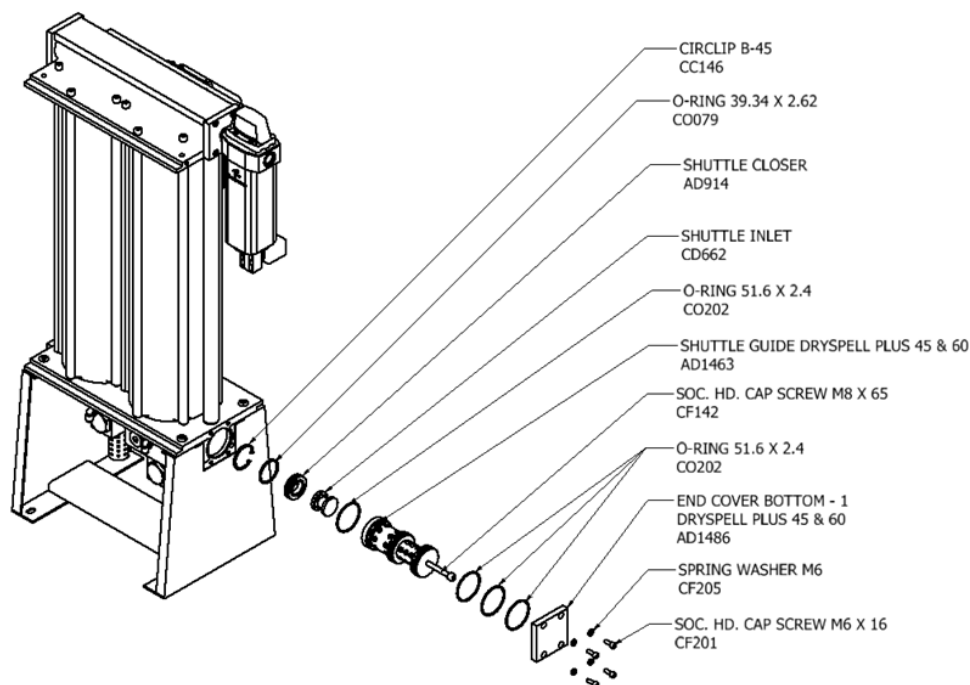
Exploded view of bottom shuttle-Dryspell Plus models 45 and 60
